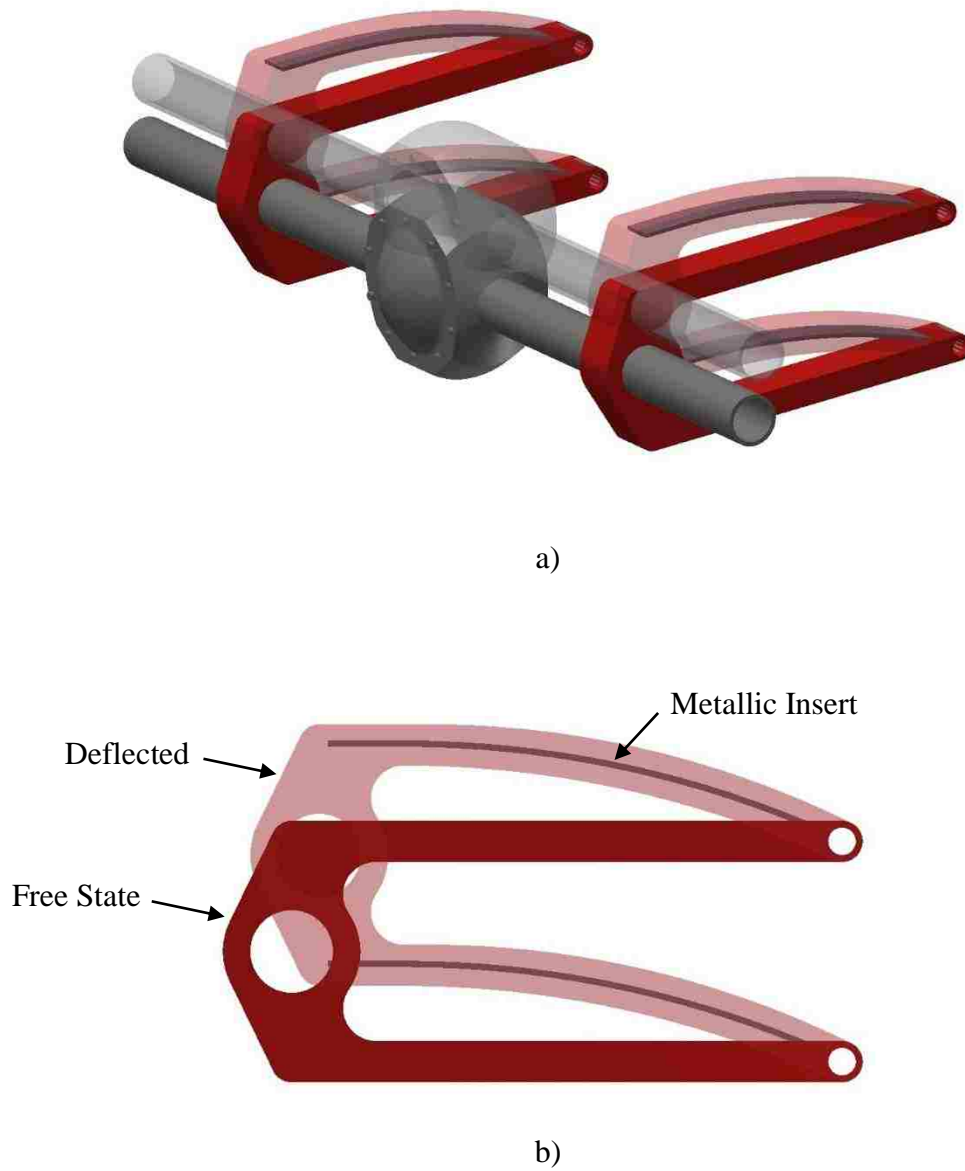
Automotive Suspension Compliant Mechanism Example a) Compliant 4-bar Mechanism Assembly and b) Compliant Mechanism
